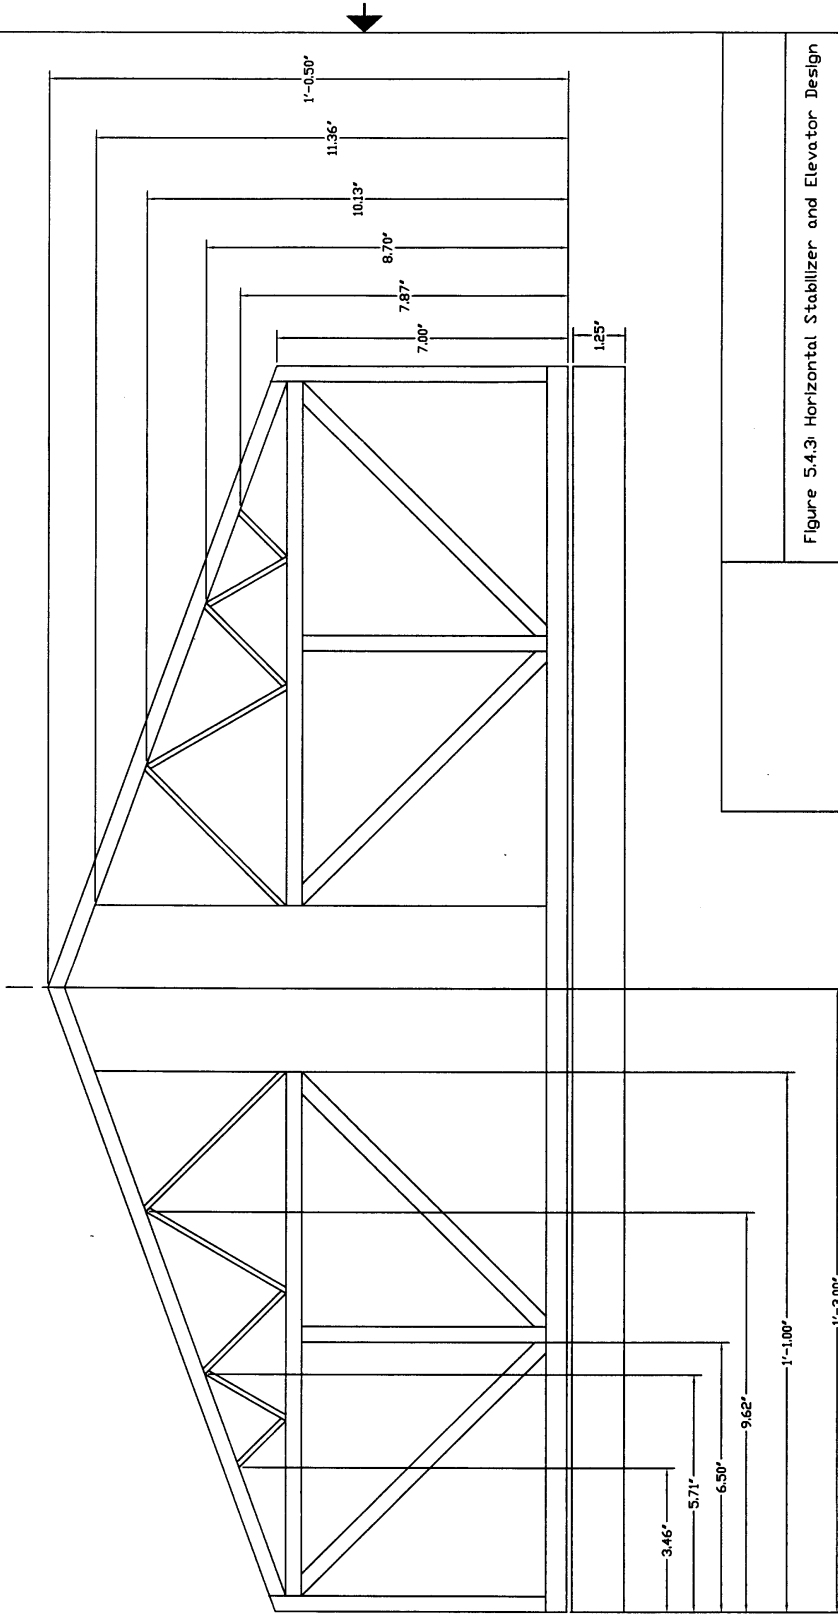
Horizontal Stabilizer and Elevator Design
